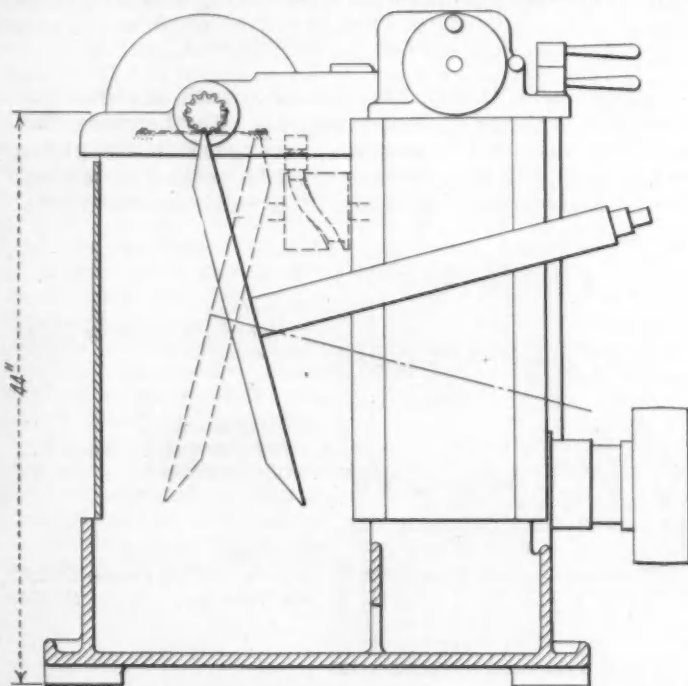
DRAWING, PARTLY IN SECTION, SHOWING THE GENERAL OUTLINE OF THE GEAR-GRINDING MACHINE
